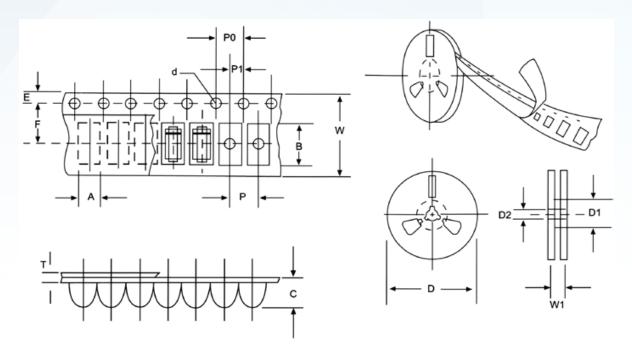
FIG: CONFIGURATION OF SURFACE MOUNTED DEVICES TAPING
